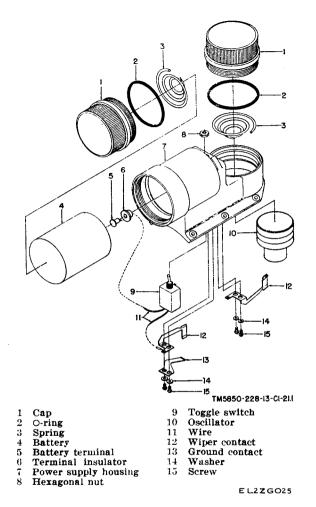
Power Supply Assembly (Serial Numbers 2101 and Up), Exploded View.
